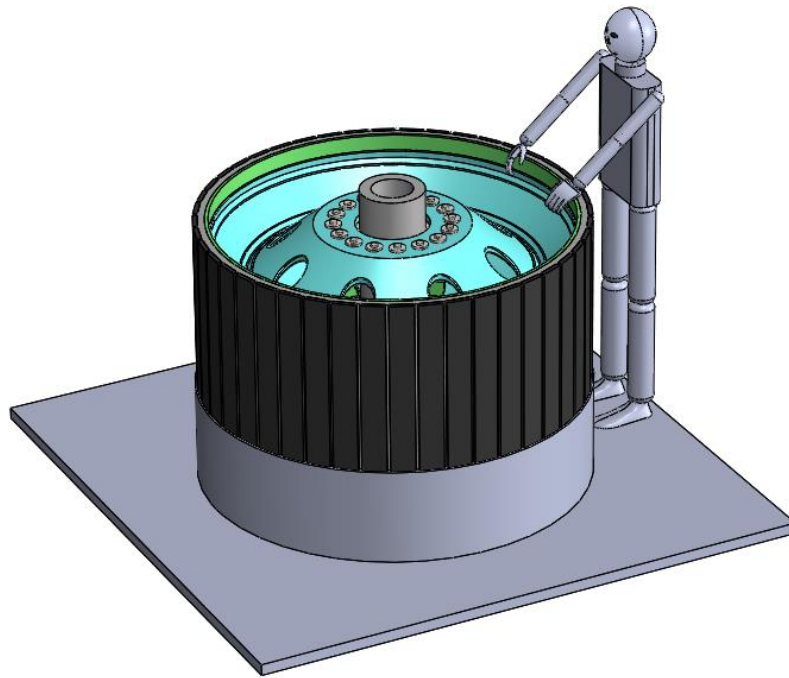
Complete rotor on jig with 1.90 m mannequin for scale.
